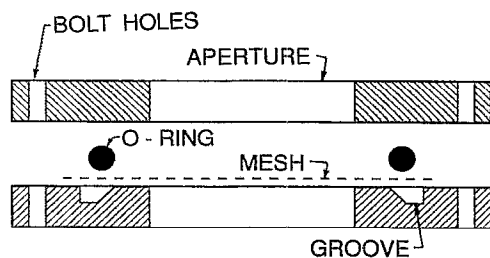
Schematic of sandwich consisting of two stainless-steel plates, modified O-ring groove, electroformed nickel mesh, and O-ring. Dimensions not to scale.
